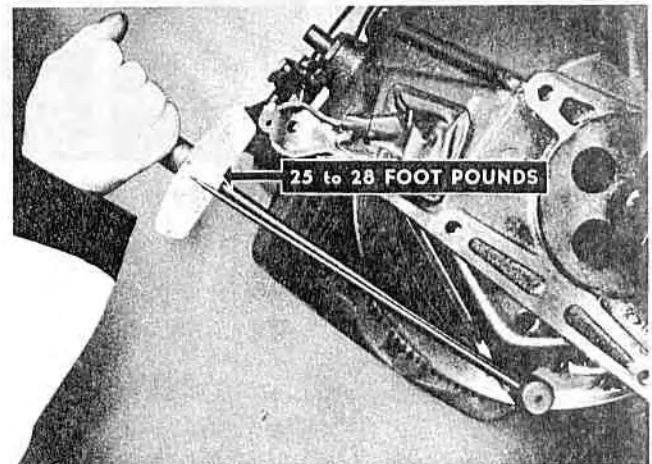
Torque Tightening the Clutch Cover to Flywheel Cap Screws
